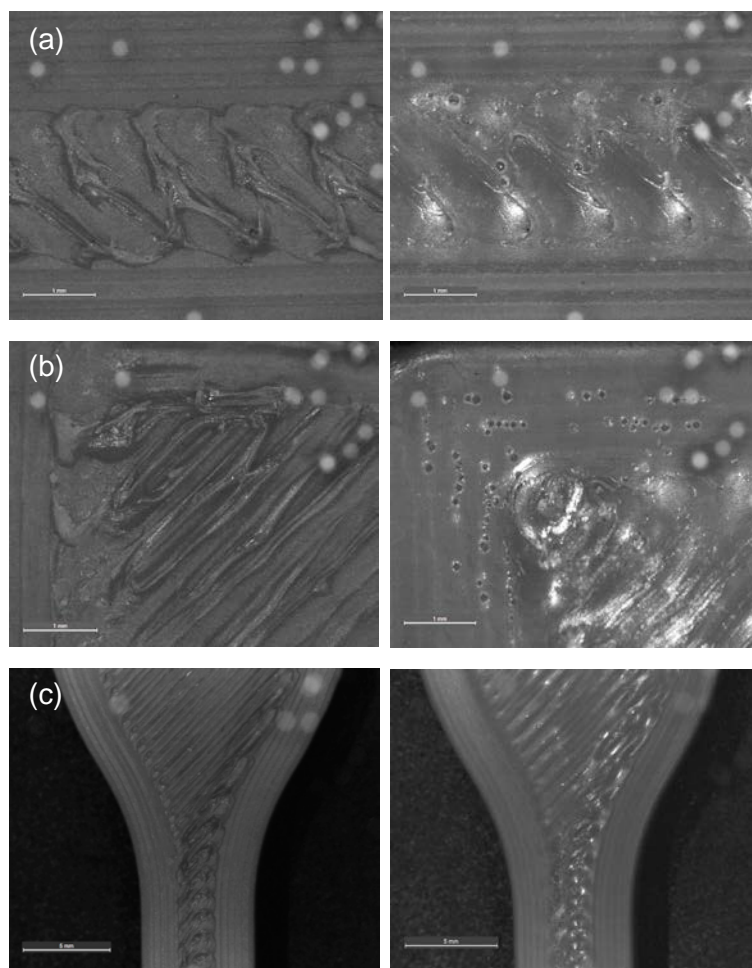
BATCH 2 (A) GAUGE SECTION (B) CORNER OF GRIPPING SECTION (C) NECK
